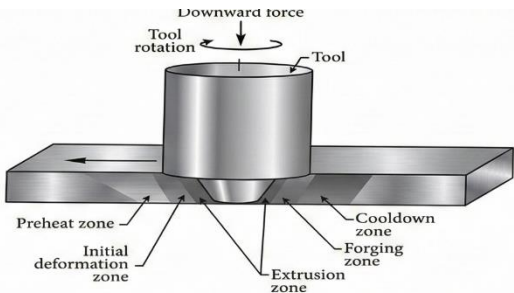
Stages in the Friction Stir Welding (FSW) process
